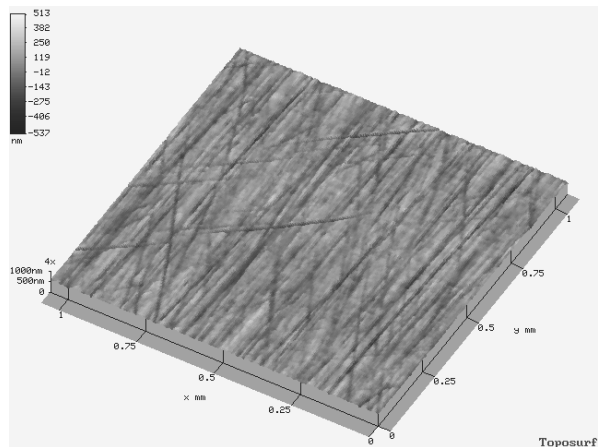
Isometric view of surface machined with ceramic tools and abrasive stones (HT2+SF),  $S_{ra} = 0.30 \mu\text{m}$
